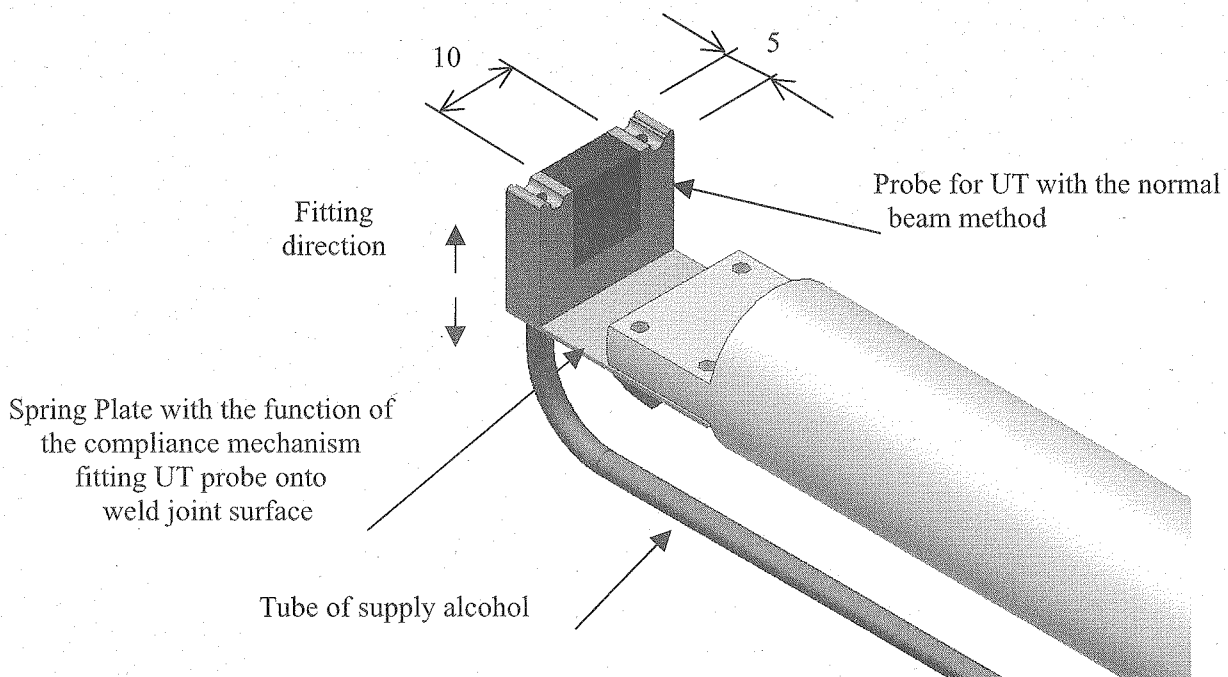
UT Tools for Inspection of Cover Plate weldment
